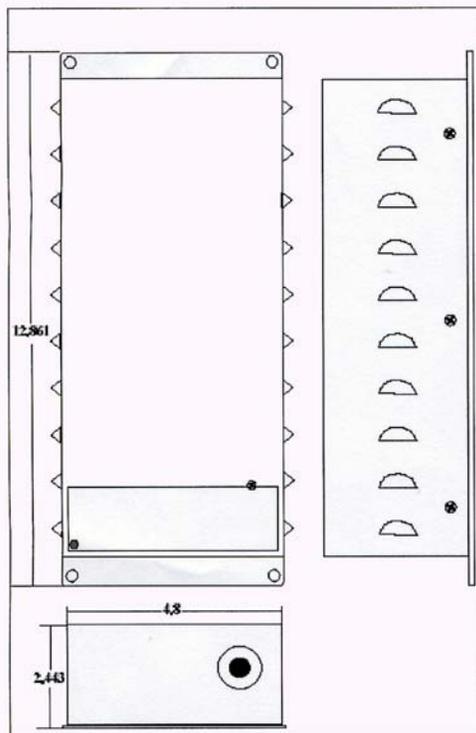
Nema 3R Aluminum Enclosure Dimensions
